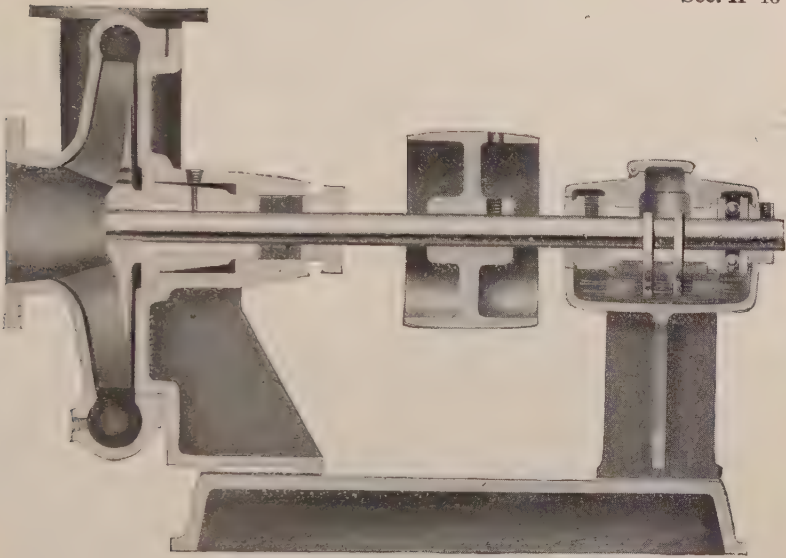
Cross section of Worthington Class C Over-hung Open-impeller Centrifugal Pump.
